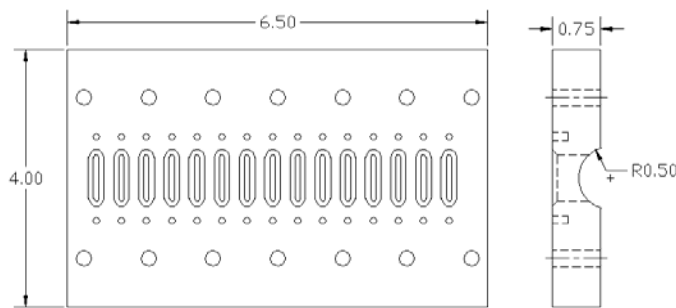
Circular Manifold Mounting Plate (dimensions are in inches)
